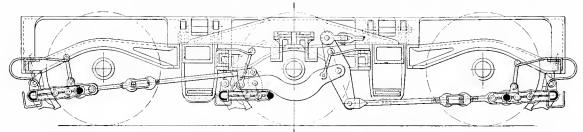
Pullman Standard Arrangement of Brake Rigging for All-Steel Six-Wheel Passenger Train Car Trucks. Chicago Railway Equipment Company.
